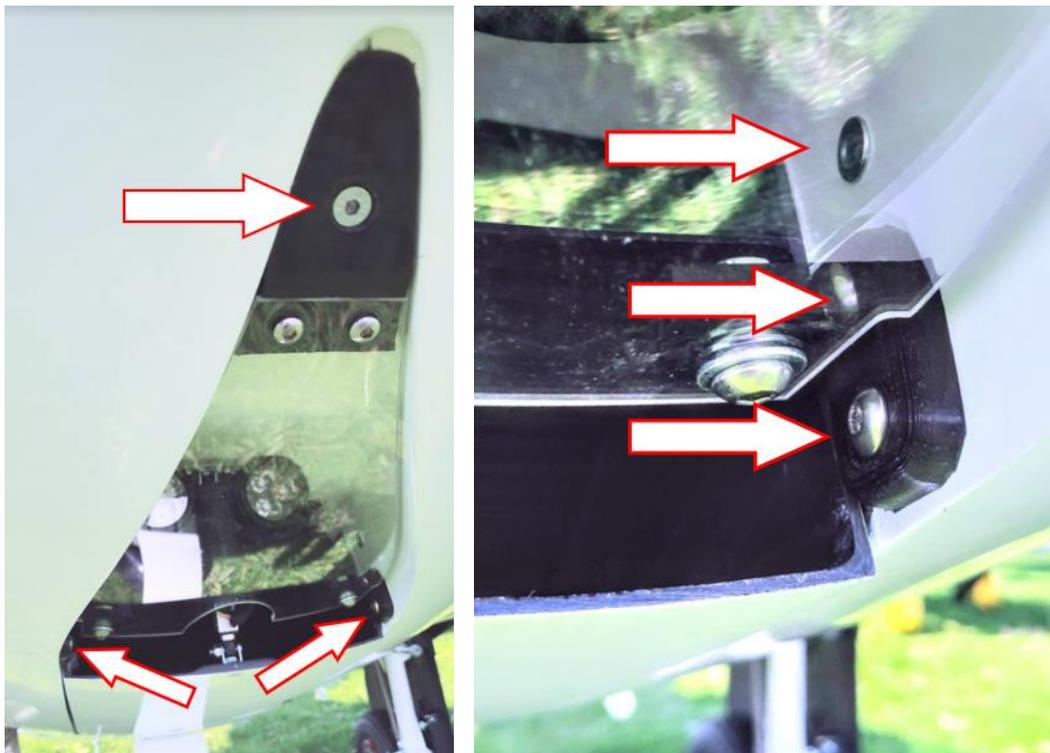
Winter plug in fully closed position, positions of nuts for adjusting
